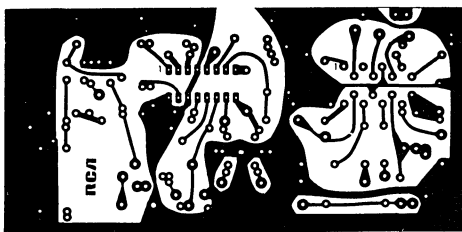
Suggested PC-board pattern and parts layout for the circuit of Fig. 14.
